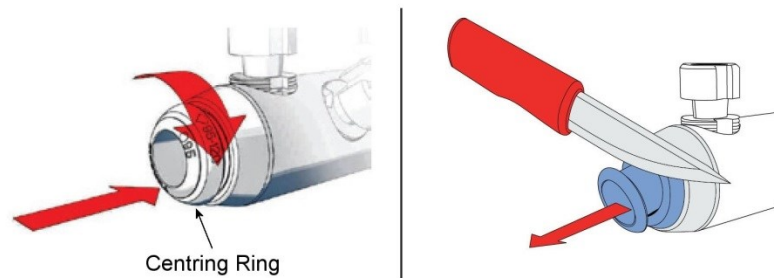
The underground cable connector consists of an aluminium body, polypropylene centring rings and shear-head screws.
